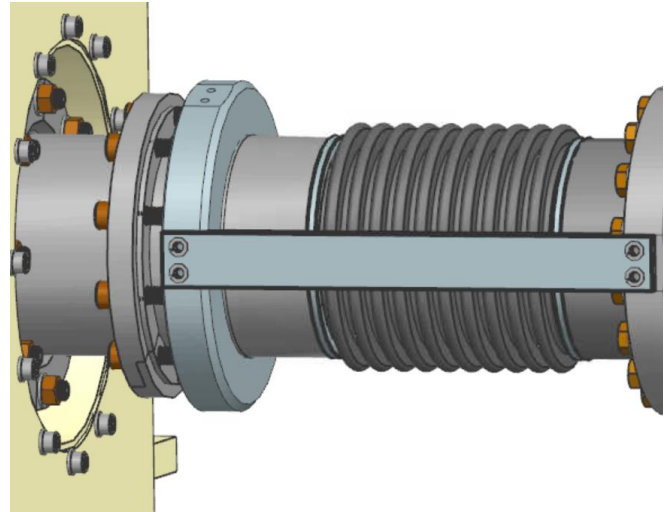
Air side coupler outer conductor and alignment bracket. The support is not shown.
